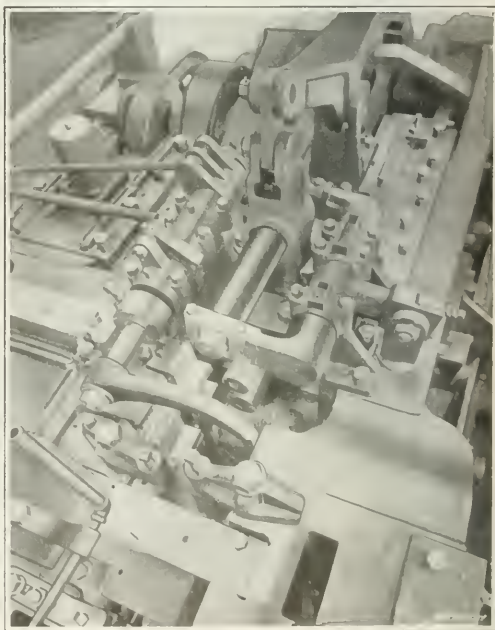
View of Dies, Tools, Tool-holder Mechanism, Stock Gage, etc.
